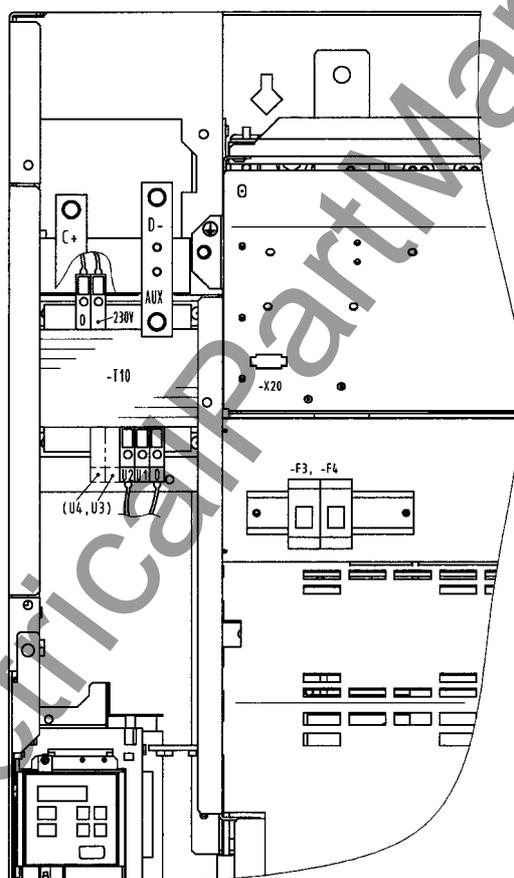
Fan transformer (-T10), fan transformer fuses (-F3, -F4)
